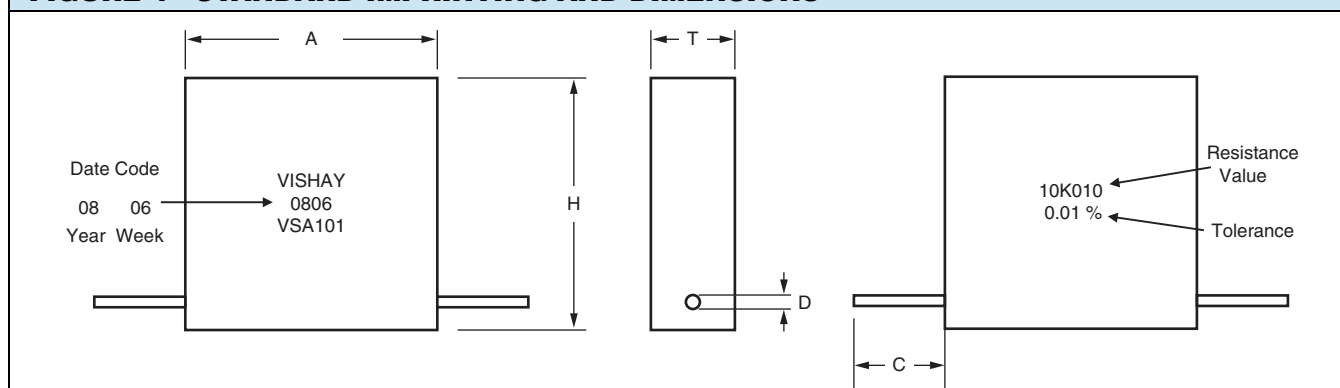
STANDARD IMPRINTING AND DIMENSIONS
